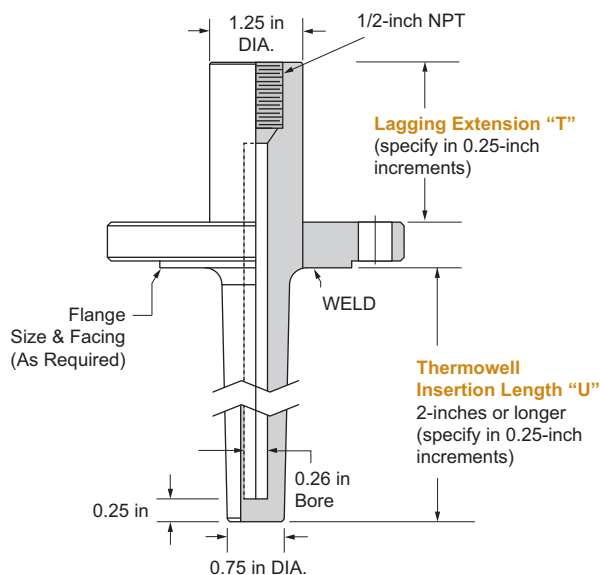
PTB-P2, P1, P3 Heavy Duty Protection Tube - for heavy wall construction applications.
